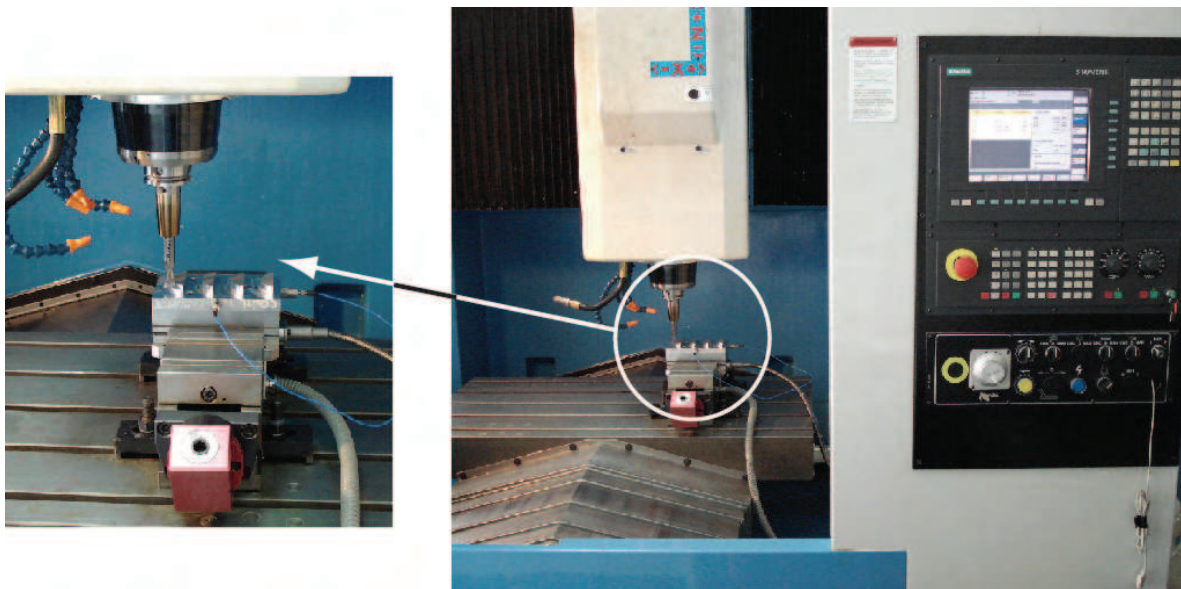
Experimental Set-up. CNC machining centre HS-1000 Kondia (Right side), and the workpiece fixed to the table after the machined process (left side).
